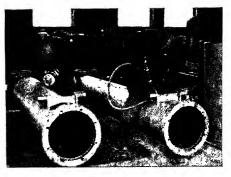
Chipping and grinding are also used to prepare the edges for welding.
